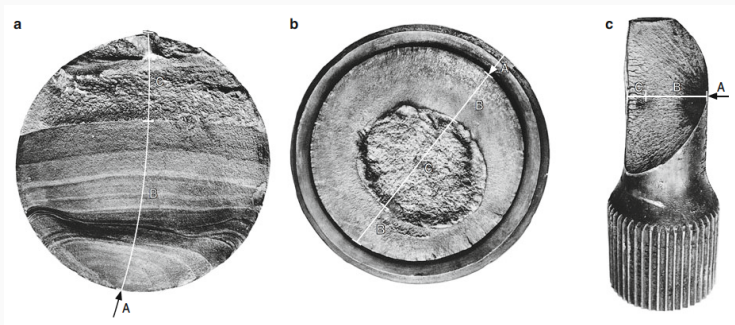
Typical fatigue fractures. a. bending fatigue fracture on the eccentric shaft of a crusher ($d = 230 \text{ mm}$) at the transition from the shaft to the eccentric, b. Circular bending fatigue fracture on the driving axis of a tilting plow. Cause: too small fillet radius, c. torsional fatigue failure on a torsion bar spring [6].
